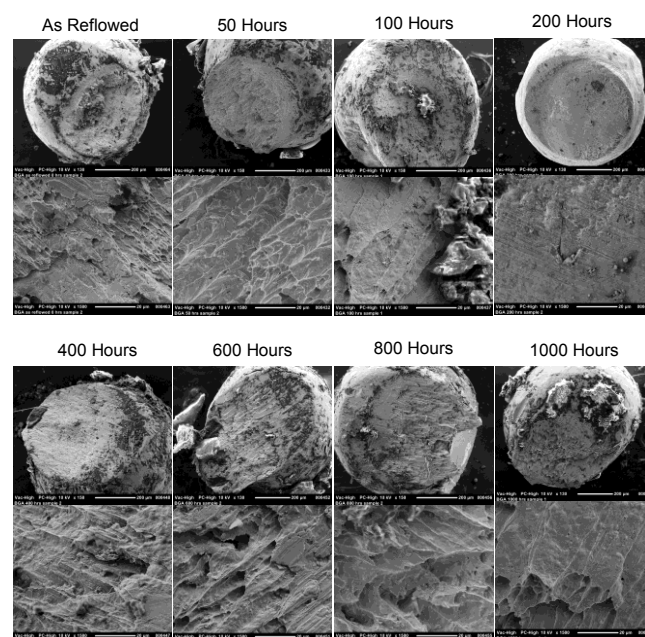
Fracture surfaces of BGA joints on Au/Ni-Cu metallisation at different ageing times.
